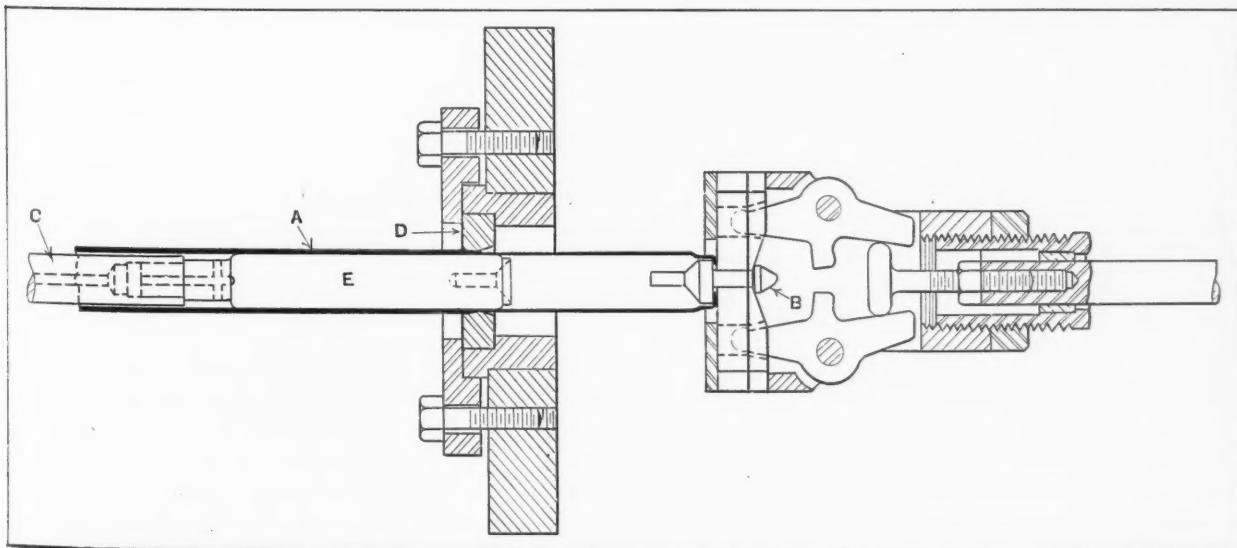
The Pushing Plunger E has Returned to the Starting Position Preparatory to Moving Forward Again with the Pulling Head a Distance of 8 Inches, thus Reducing the Tube by a Series of Drawing Movements
